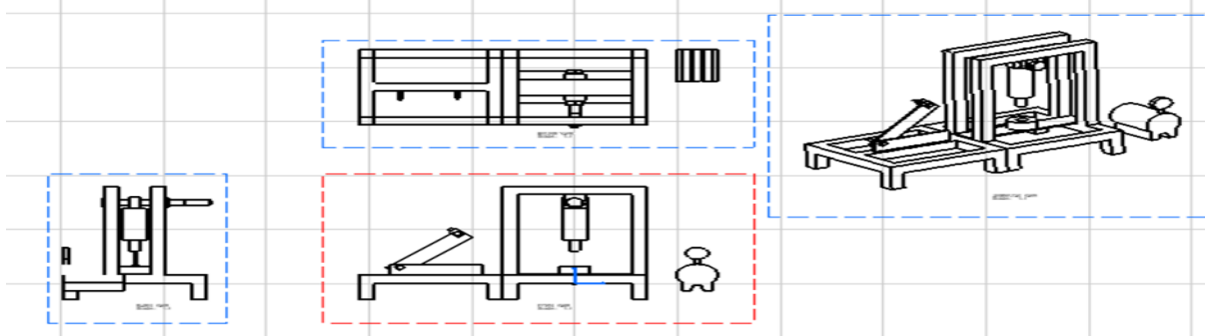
CATIA Drafting of Multipurpose Sheet Metal Processing Machine
